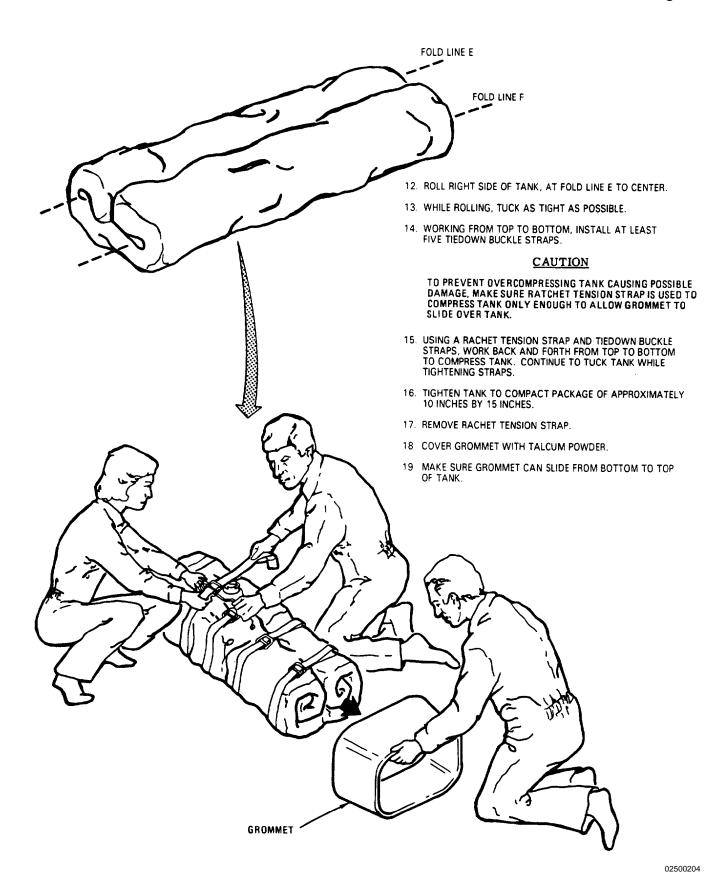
Installation - No. 3 Fuel Tank Folding (Sheet 4)
